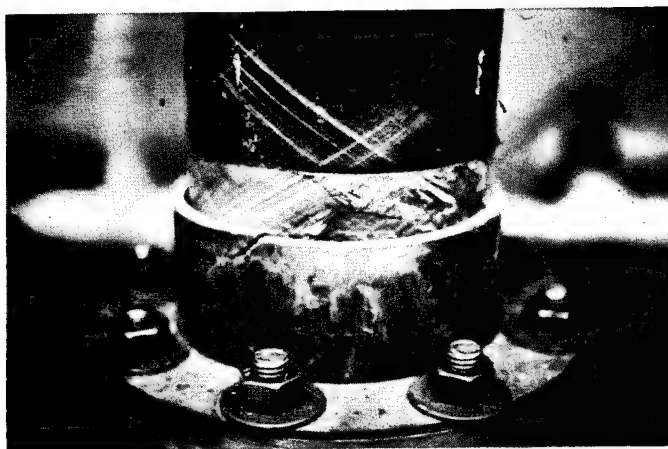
Failure In Specimen Caused Flange Failure
